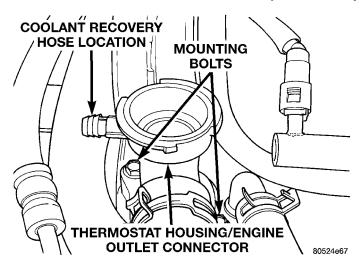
Thermostat/Engine Outlet Connector—DOHC RADIATOR
